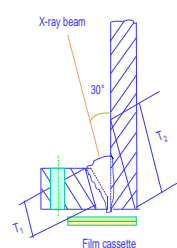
The essentials of RT procedure for Nozzle-to-hole flange combined welds
